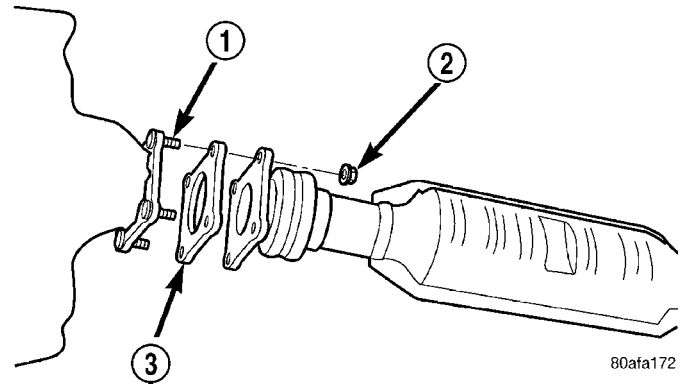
Catalytic Converter to Exhaust Manifold Connection - Typical
